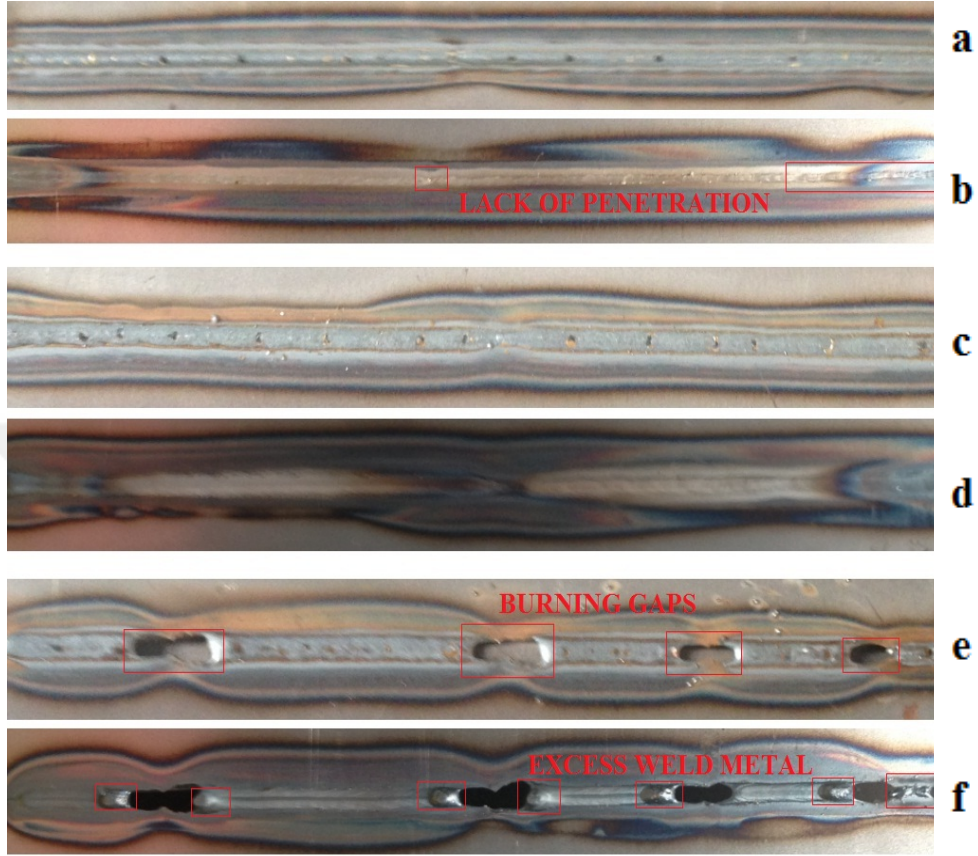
Samples obtained under the different welding conditions (a)Welding cap of 19th Run, (b) Welding root of 19th Run, (c)Welding cap of 25th Run, (d) Welding root of 25th Run, (e)Welding cap of 38th Run, (f) Welding root of 38th Run
